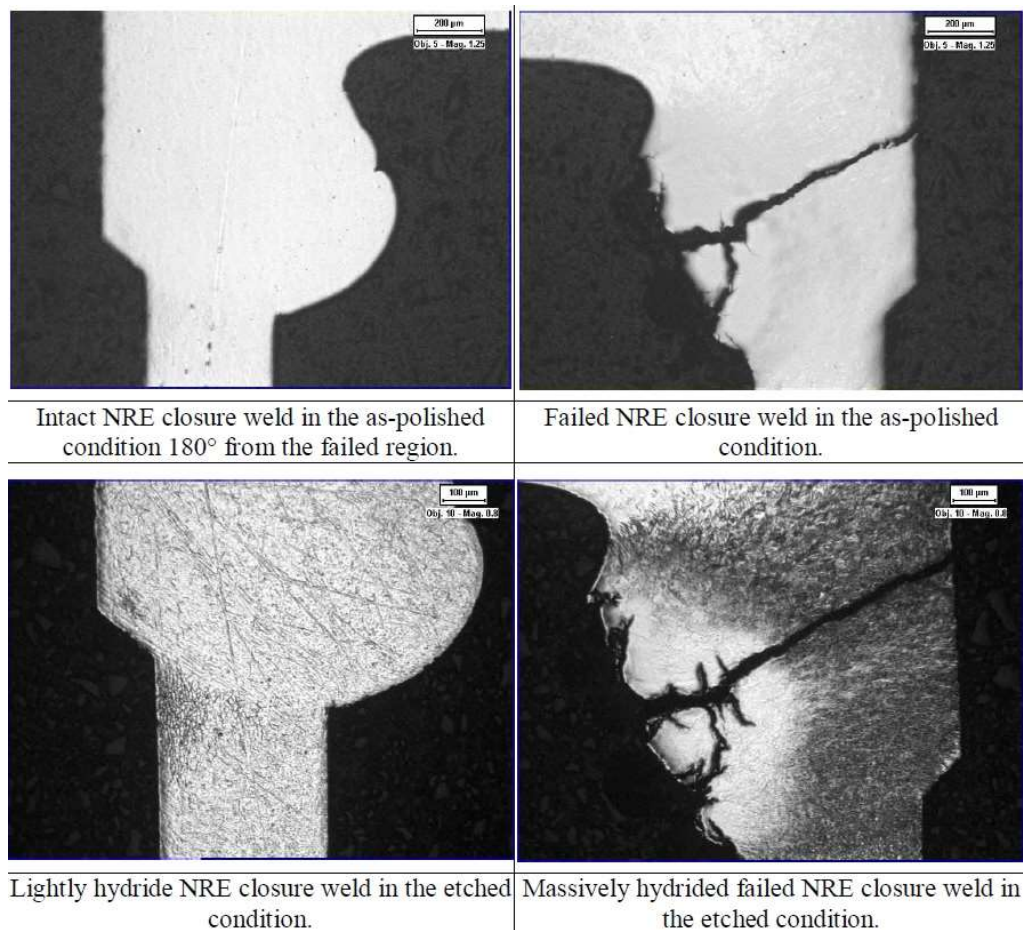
Defected end-closure weld at the NRE endcap, element "9".
